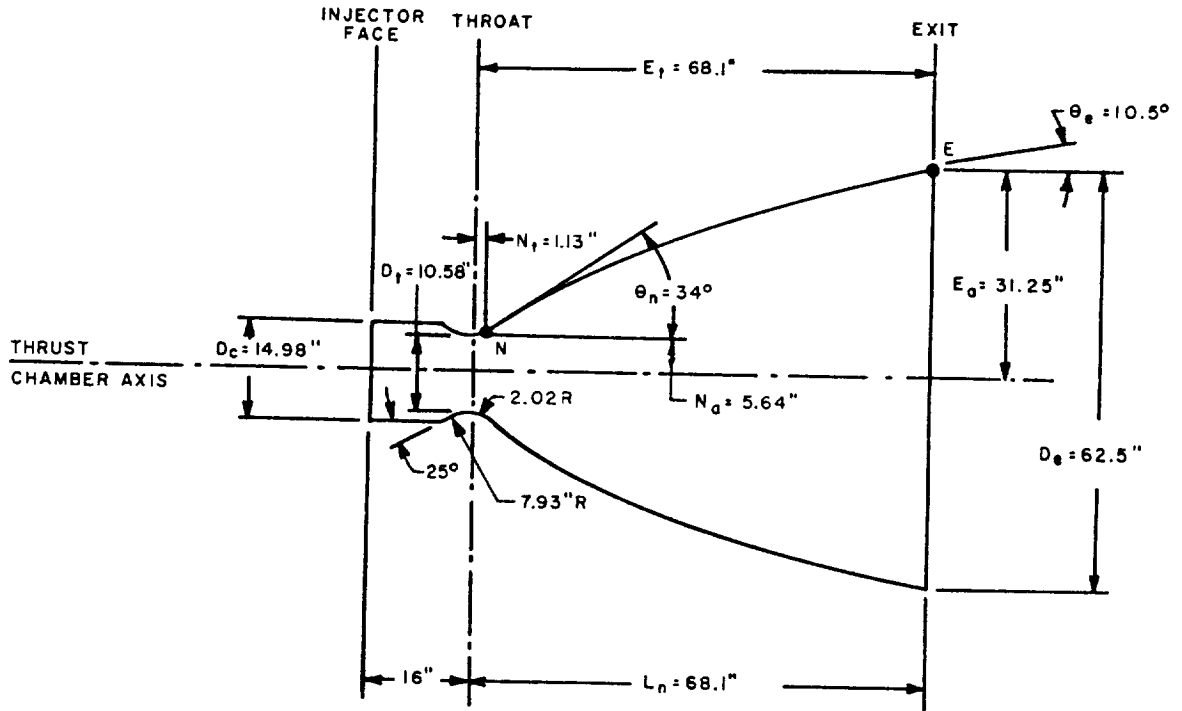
A-3 stage engine thrust chamber, internal configuration layout:
